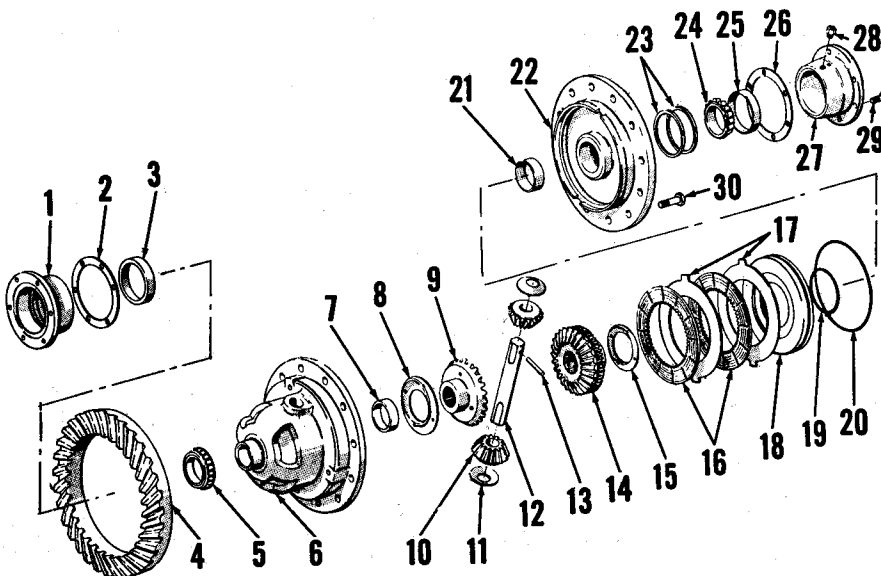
Exploded view of differential showing lock components and carrier bearings. Cap screws (30) retain cover (22) to differential case (6) and also retain main drive bevel ring gear (4) to differential case; refer to Fig. 171 for installation of ring gear. Fluid for operation of differential lock piston (18) enters right carrier bearing support through fitting (28) and is transmitted to cover (22) through bore in hub of cover. Sealing rings (23) fitted in grooves in cover hub are located at each side of oil passage in bearing support (27) and hub.
